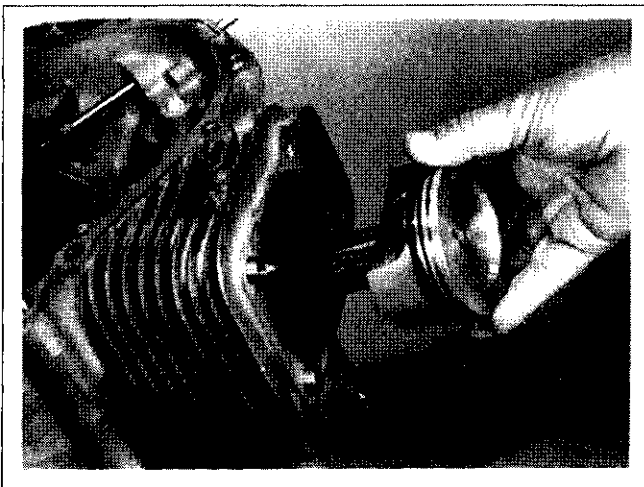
Removing Piston/Connecting Rod Assemblies.
